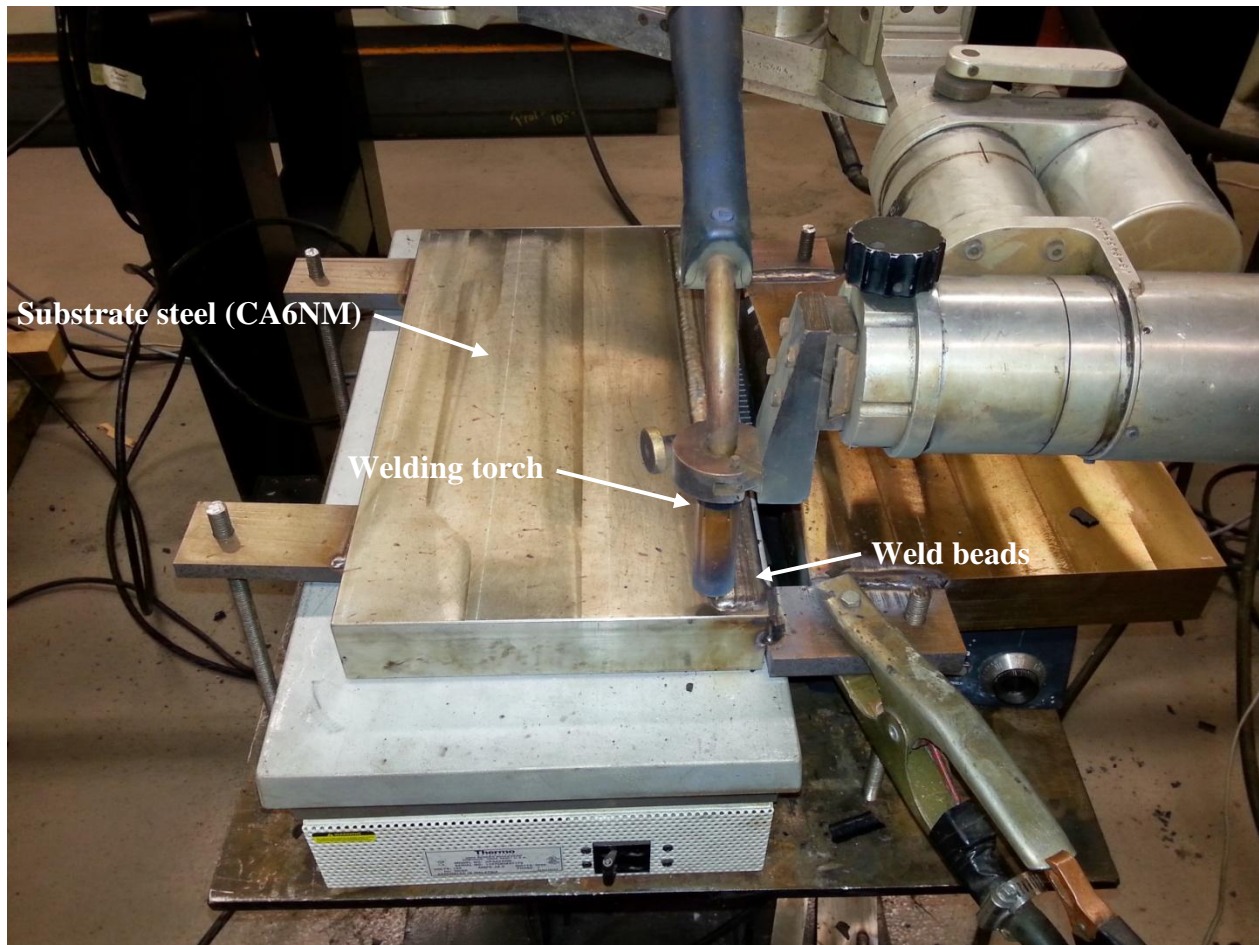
Welding assembly of the semi-automatic FCAW process
